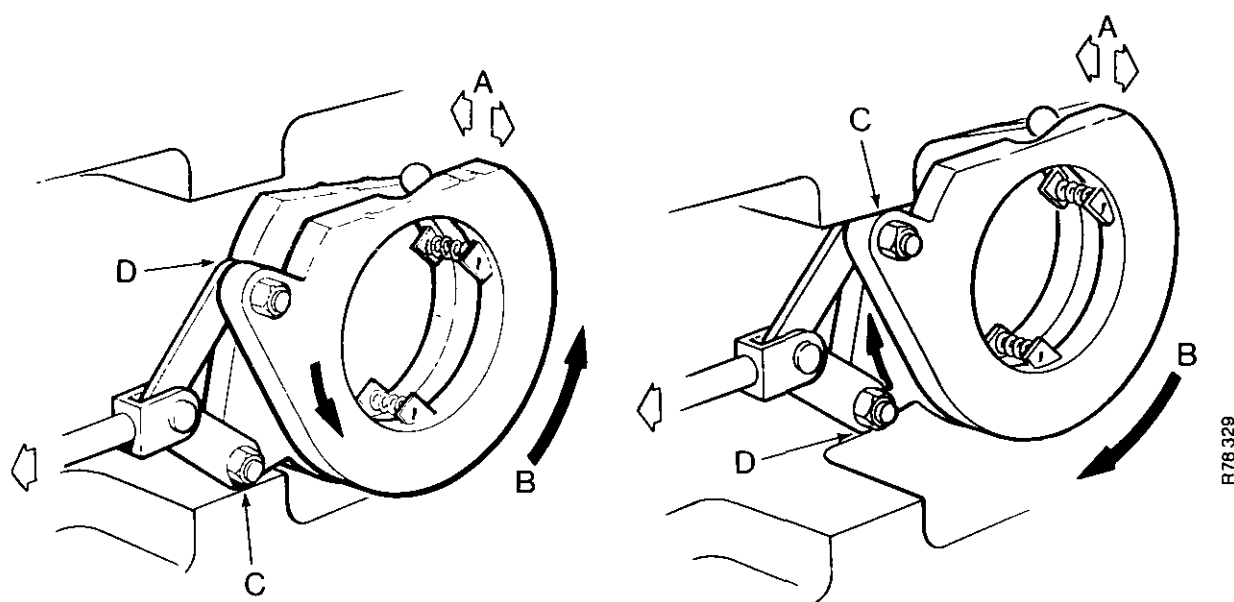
OPERATION OF ACTUATOR ASSEMBLY
